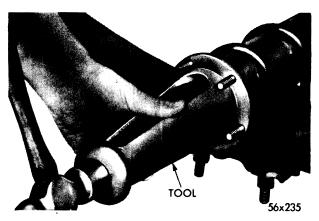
Installing Axle Drive Shaft Bearing Cup with Tool 413
